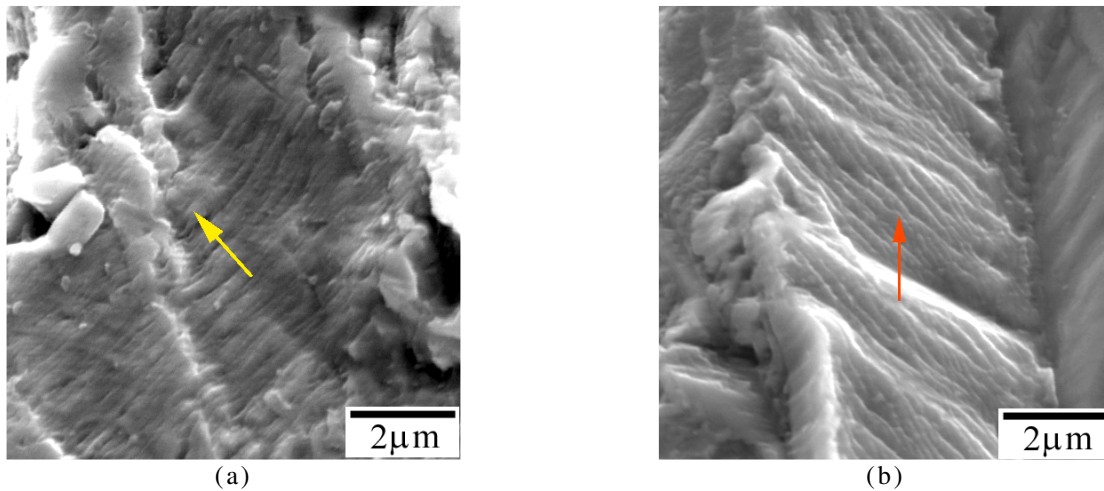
Patterns of fatigue rifting developed on the fracture surface during the progress of cracks: (a) secondary and (b) main. Arrows indicate direction and location of the crack growth
